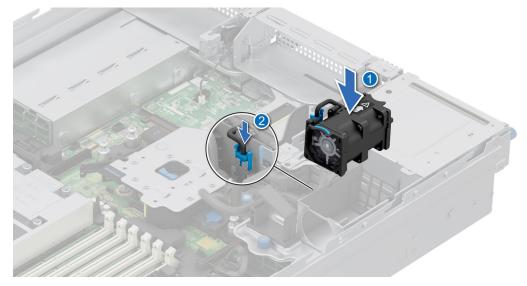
Installing a 4 \times EDSFF E3.S rear drive module cooling fan
